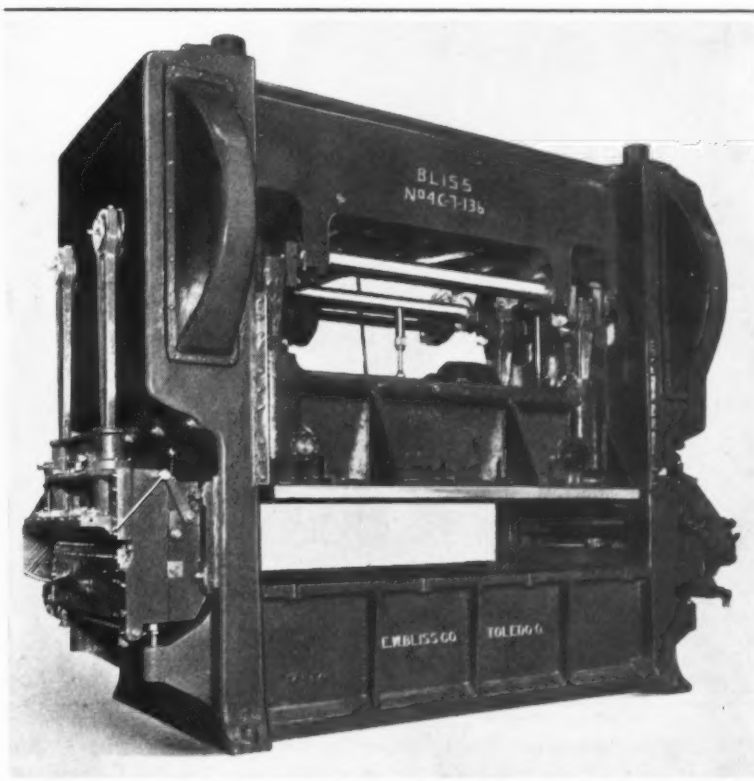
Bliss High-production Press of the Type Used in Blanking Large Sheets for All-steel Automobile Bodies, Equipped with an Automatic Feed and Scrap-cutter
